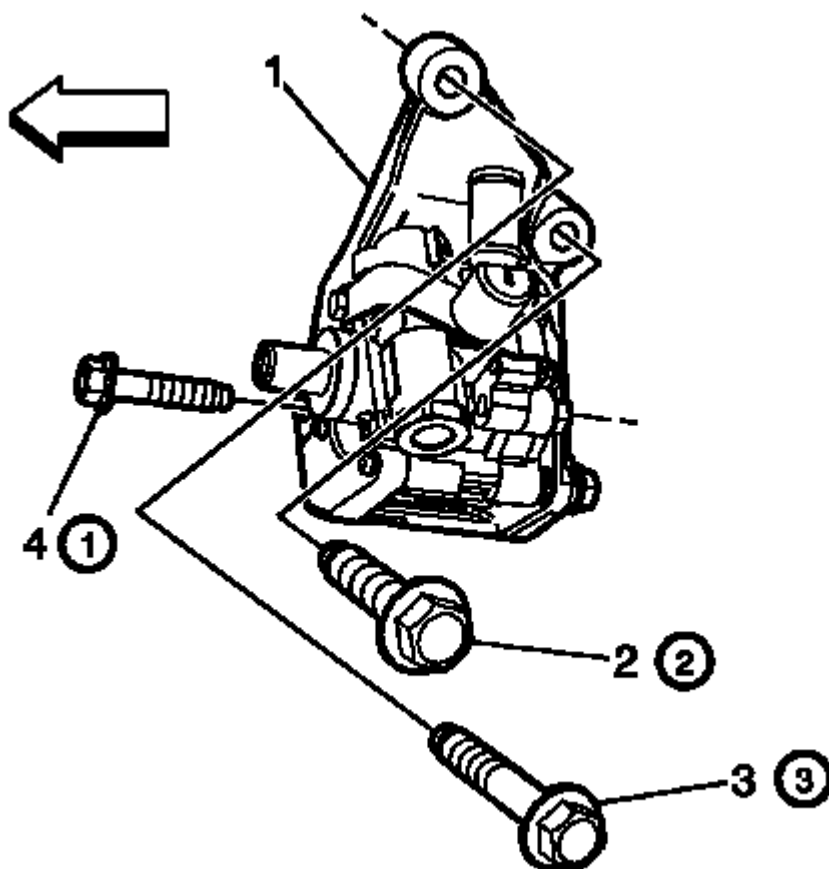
Power Steering Pump Bracket & Bolt Tightening Sequence
